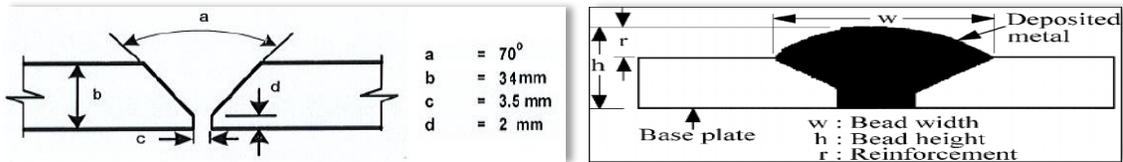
Joint design detail used for FCAW welding (WPS sheet Appendix 1)
